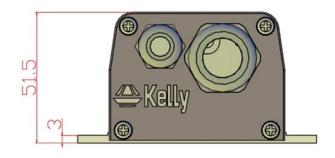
KLS-12S mounting holes' dimensions (dimensions in millimeters)
